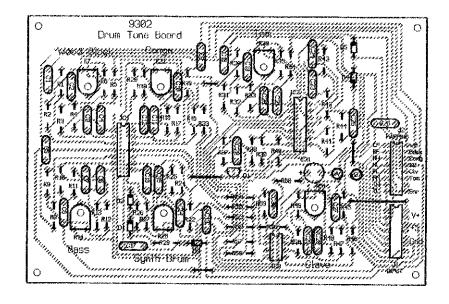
This phantom view of the copper conductors will be useful if you have to trouble shoot the circuit.
